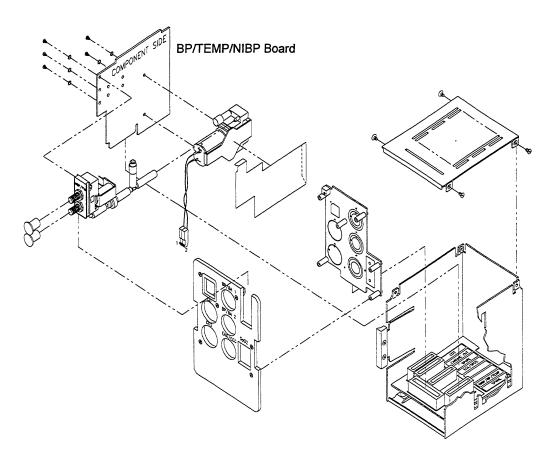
Noninvasive Blood Pressure Option - Exploded View
